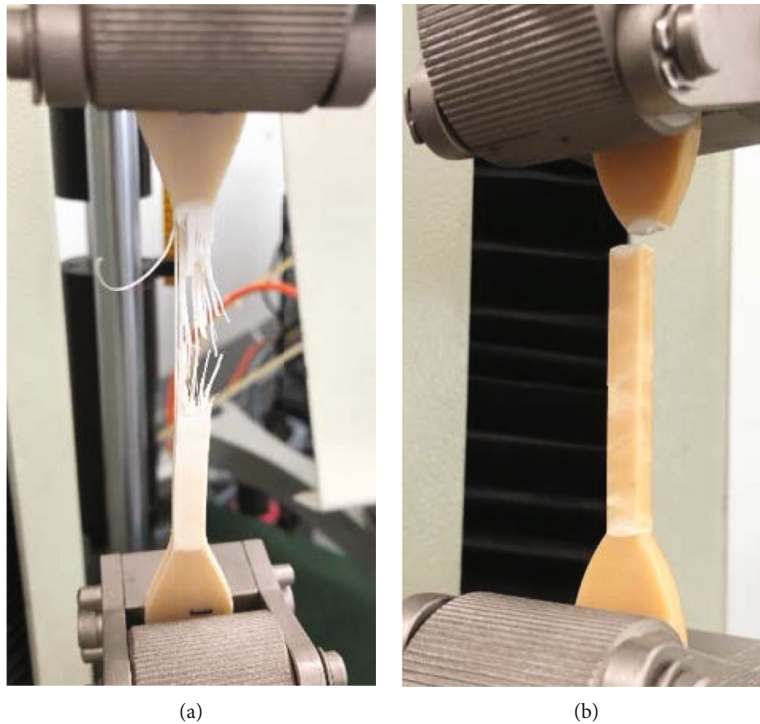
The deformation at break points of PLA/NR specimens fabricated by (a) 3D printing and (b) compression molding techniques at 190°C.
